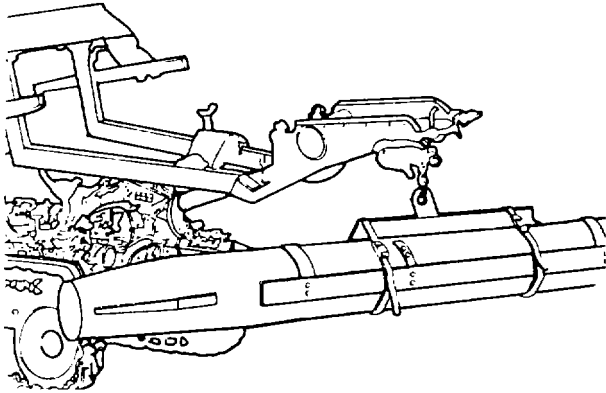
Missile Hoisting Beam XM15 and Hoist Adapter Proof Loading Test
